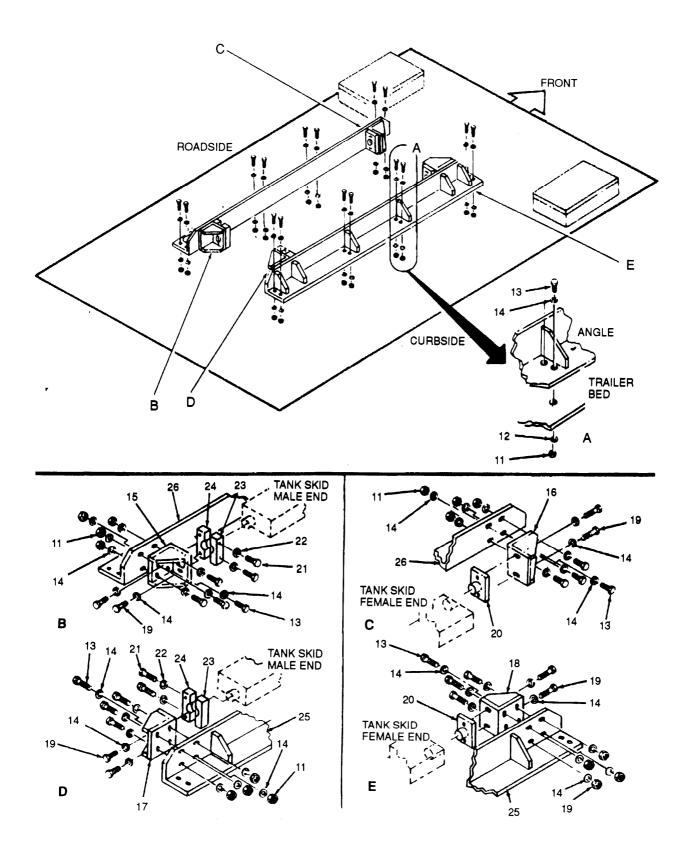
Hold Down Assembly (Sheet 2 of 2)
